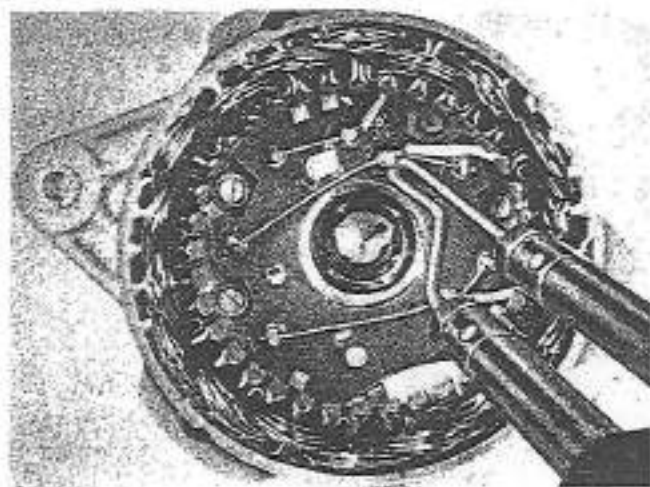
Soldering of the stator windings to the commutator points of the diode plate
